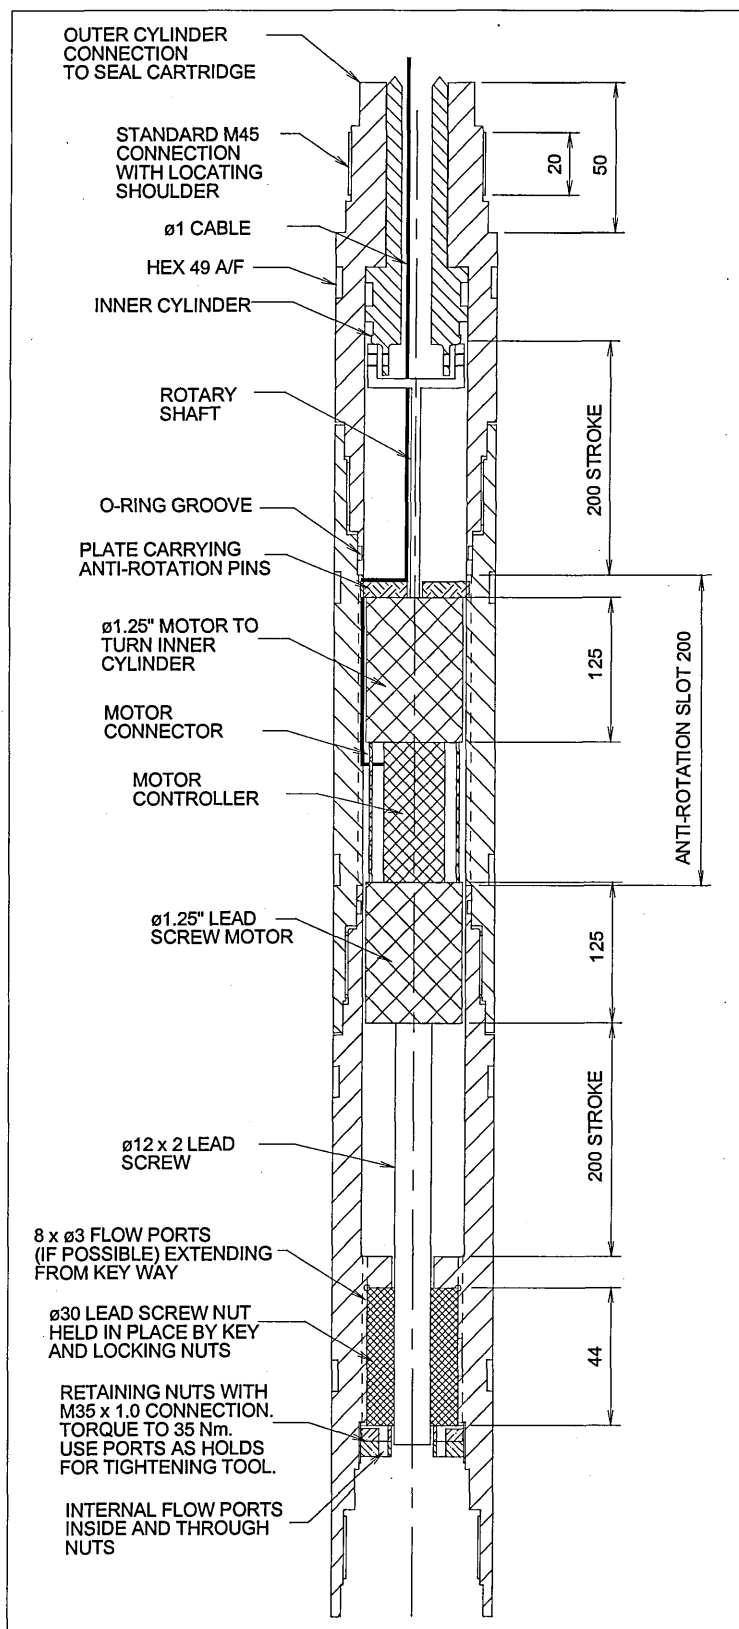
LOWER CYLINDER DESIGN INCORPORATING MOTORS, LEAD SCREW, LEAD SCREW NUT AND CABLE
